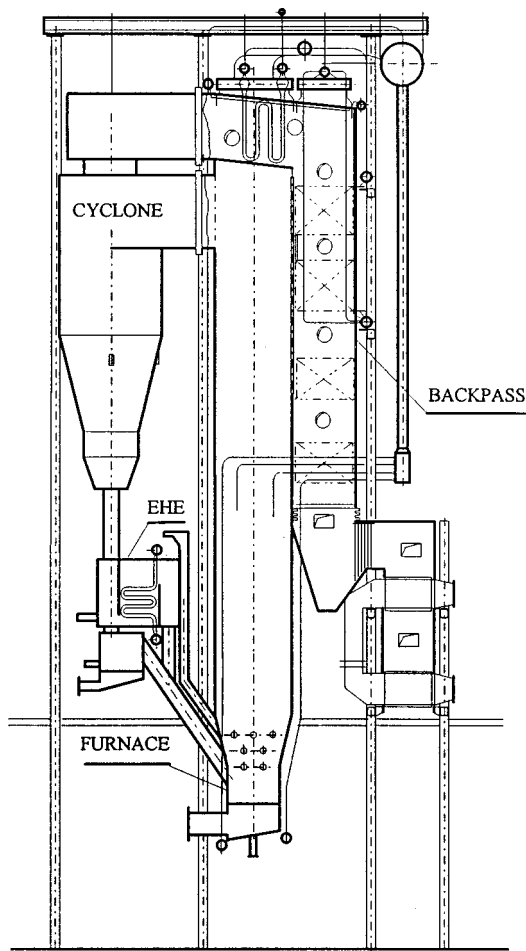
62-MWt circulating fluidized bed boiler side elevation
